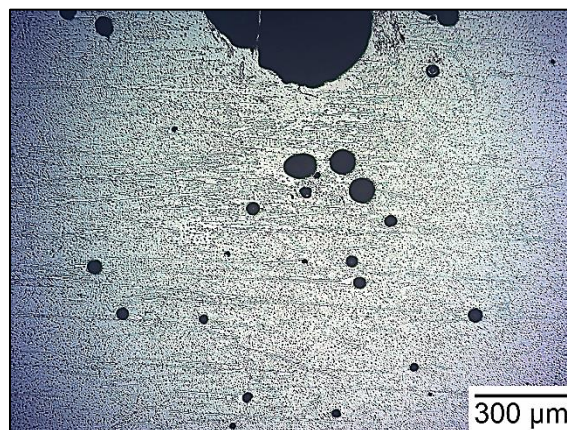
Porosity of the sample welded with Al-Mg-NbB₂ 2% filler.
